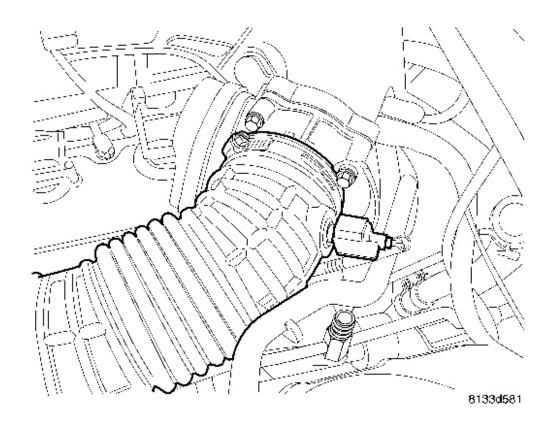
Locating Manifold Absolute Pressure Sensor Courtesy of CHRYSLER LLC
